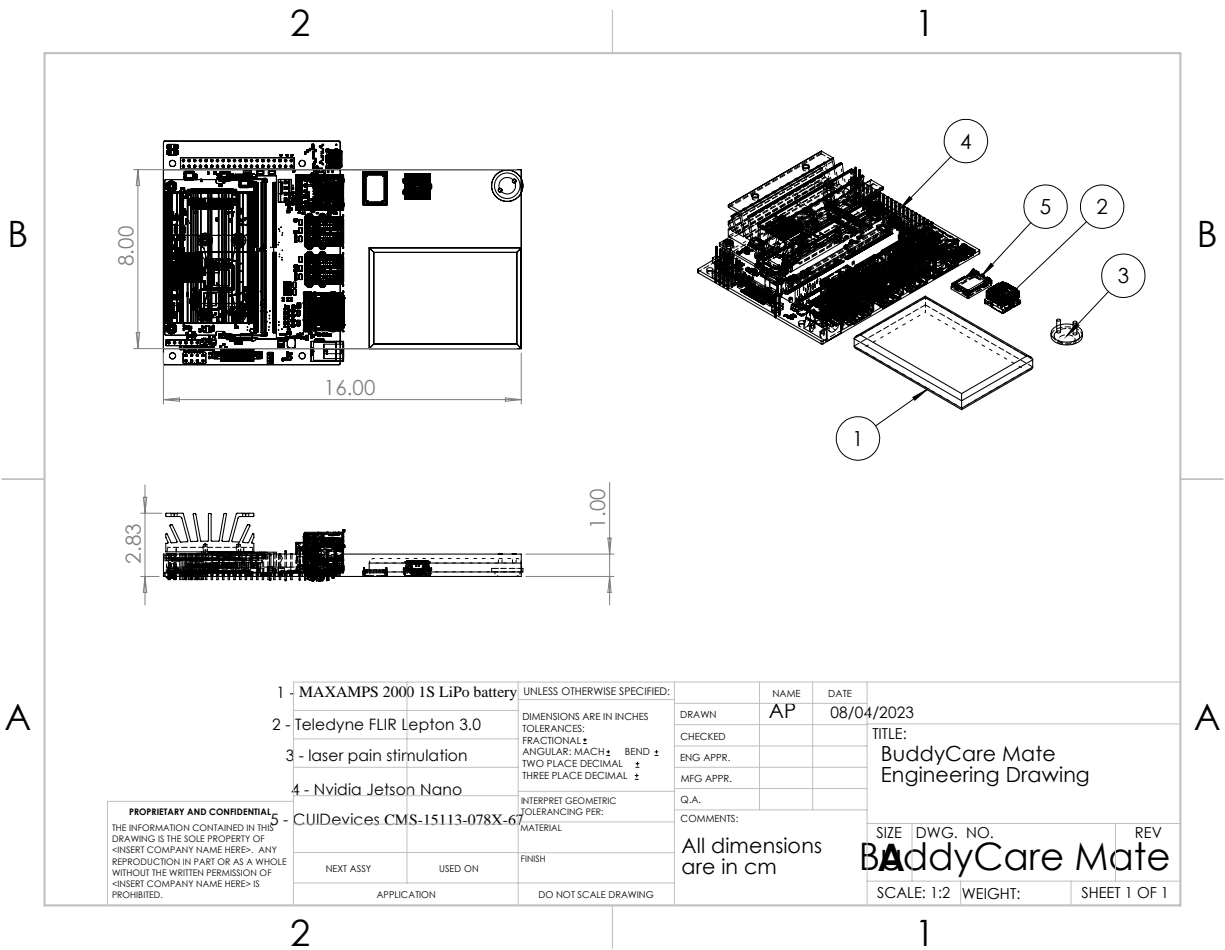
Solidworks technical drawing depicting computer, battery, speaker, camera, and laser.
